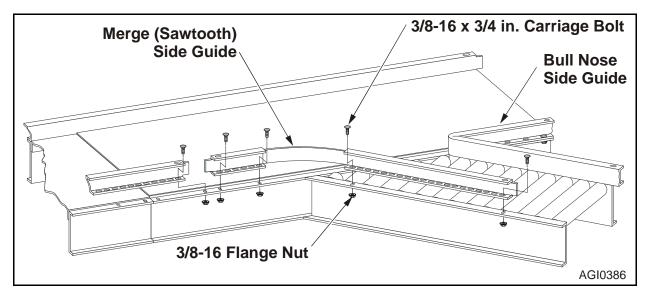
74 Direct-Mounting Side Guides on a Merge (Sawtooth) Section
